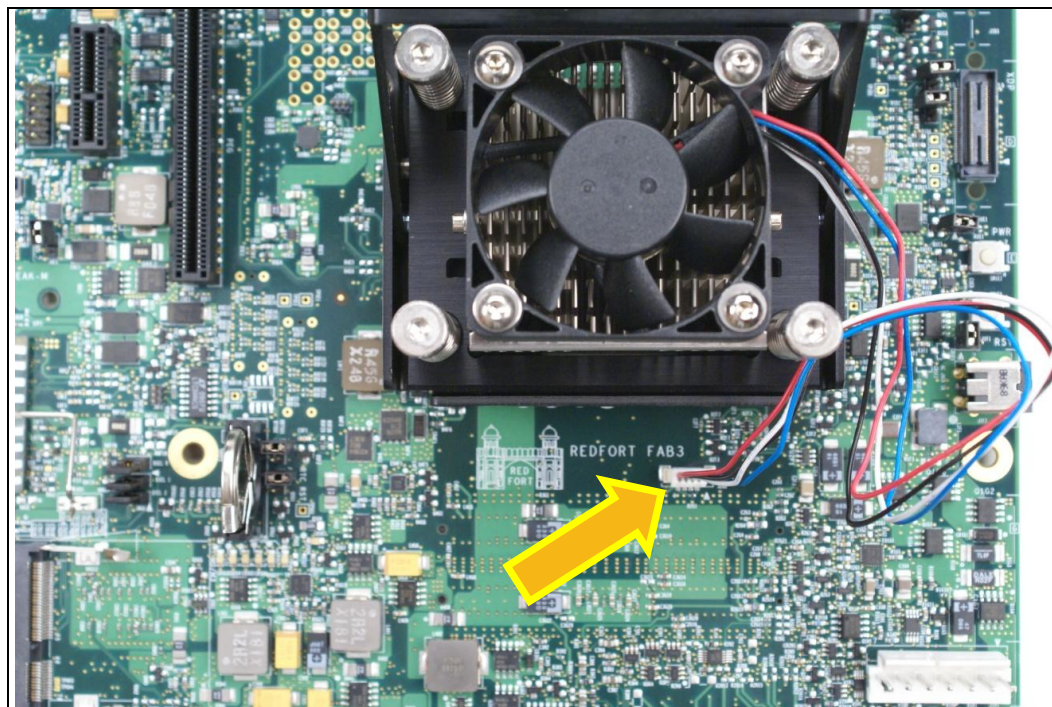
Completed Red Fort CRB with Fan/Heatsink Assembly Installed
